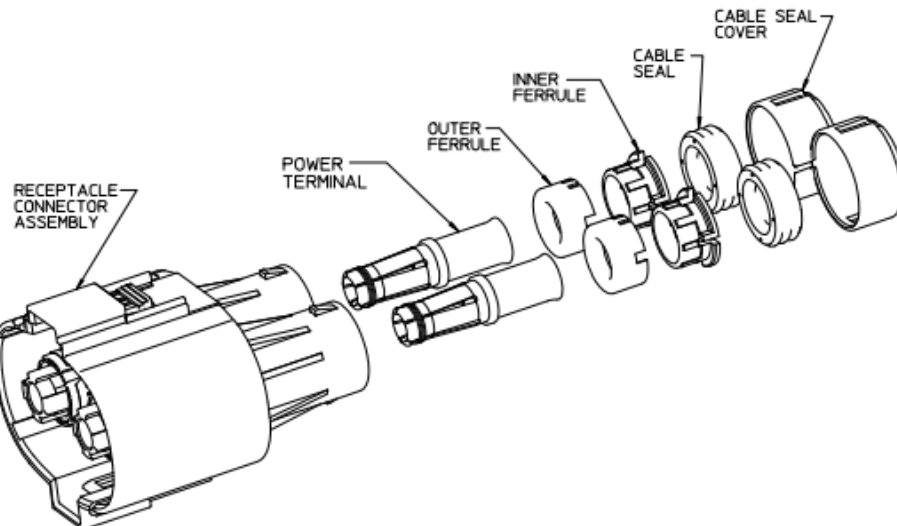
Exploded view of the Molex Imperium™ High-Voltage / High-Current (HVHC) connector system (Molex 2013)
